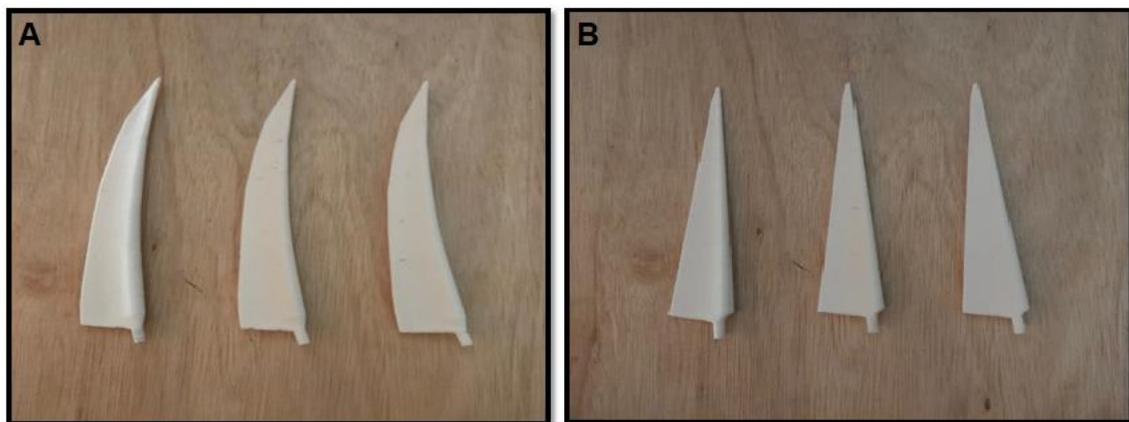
Prototype of (A) curved Blade (B) conventional blade design printed using additive manufacturing
